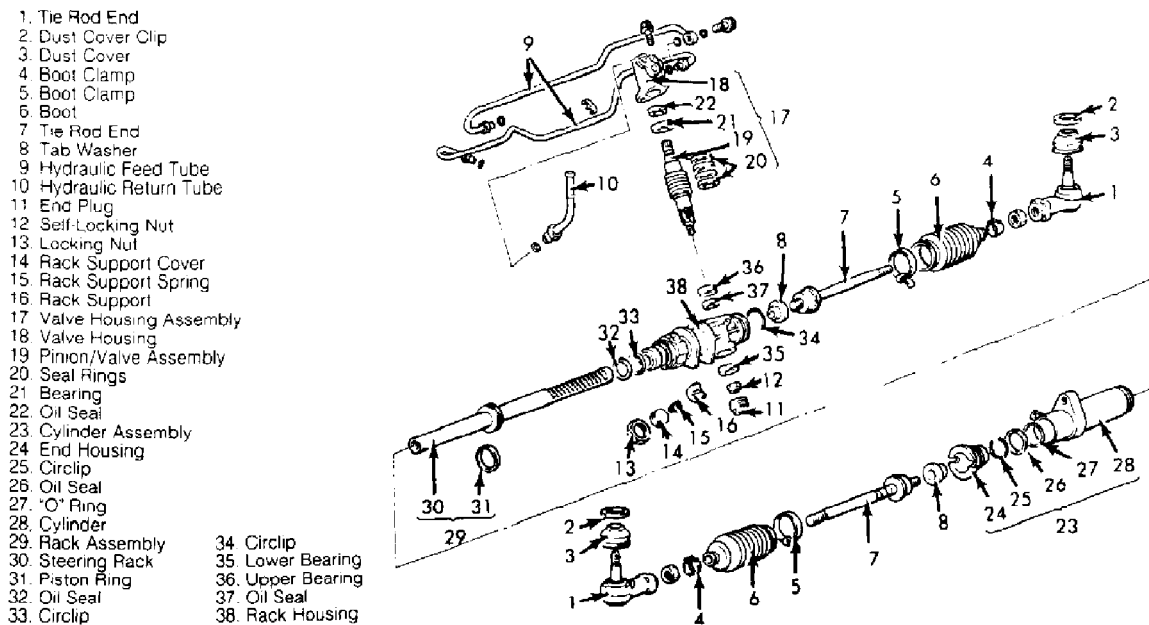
Exploded View Of Power Rack & Pinion Assembly (Typical)
